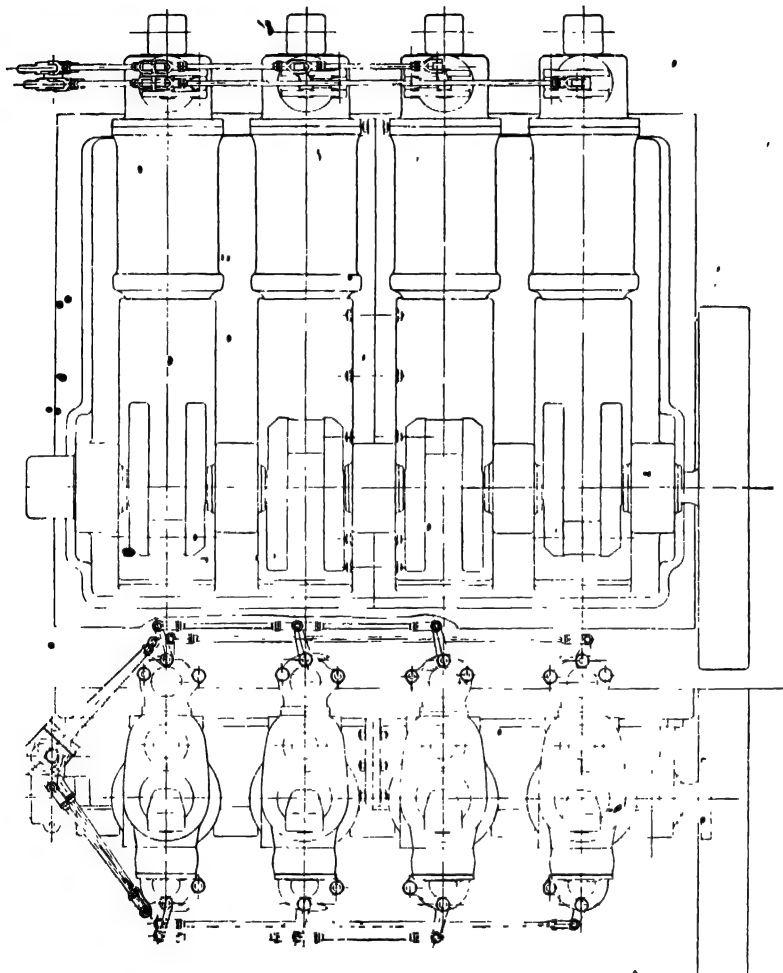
Outline Arrangement of 4-cylinder 520-B.H.P. Ruston 14-cylinder Oil Engine
